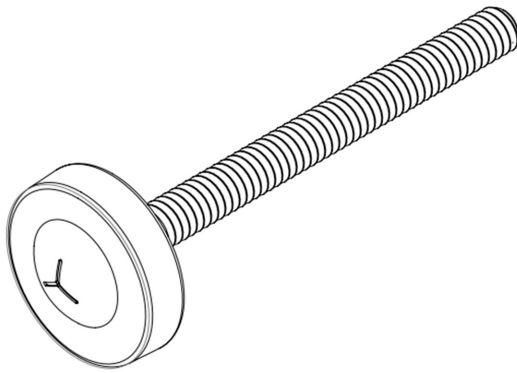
Isometric Exploded View of Carriage Bolt and Knob
